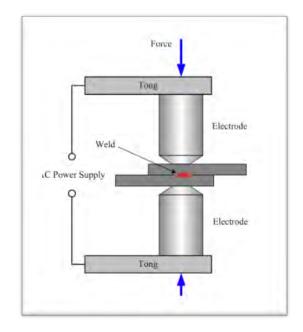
Process Resistance Spot Welding (Gabriel, 2008)
